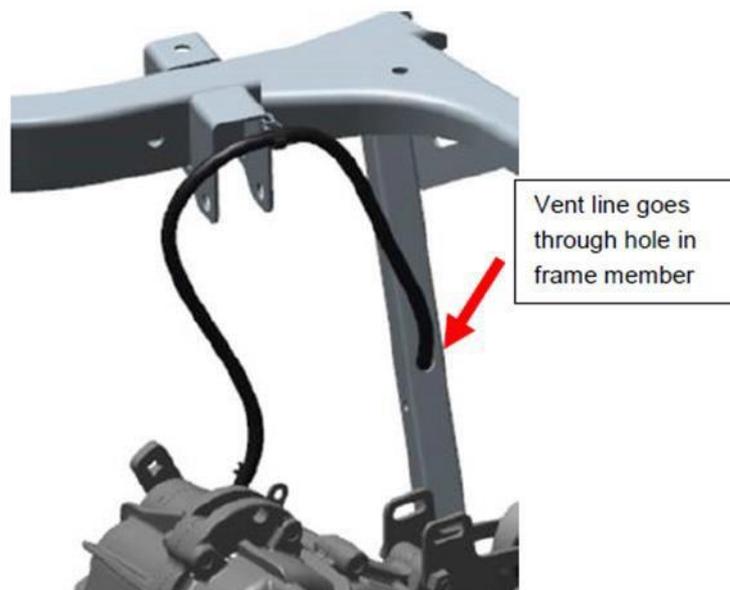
Example of a gearbox vent tube terminating inside a frame member.
